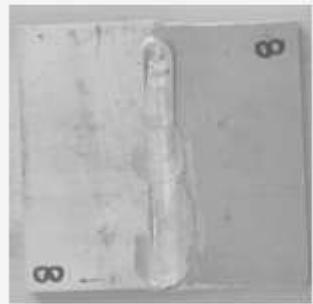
Welded plate using the rotational speed of 1500 rpm
